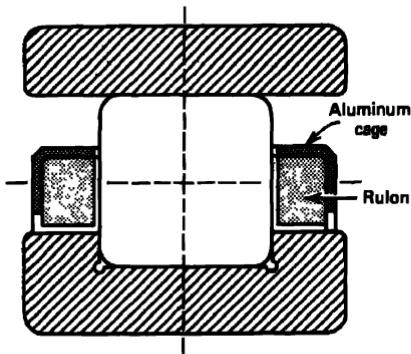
Cryogenic bearing. Cross section showing Rulon separator and aluminum cage. The separator construction is such that all sliding surfaces both in roller pockets and on the land guiding surfaces are Rulon. (Courtesy of ITI Corporation. From Reference 15.)
